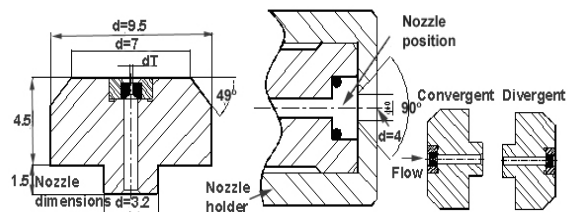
Nozzle geometry (dimensions mm), nozzle holder and two possible ways of mounting.
